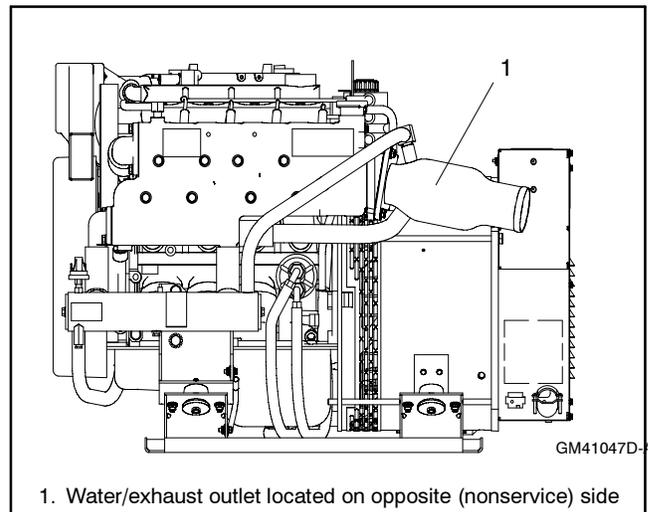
Catalyst Assembly/Exhaust Connection, 10/13/15EGD, 9/11EFGD, and 13/15EGZD
